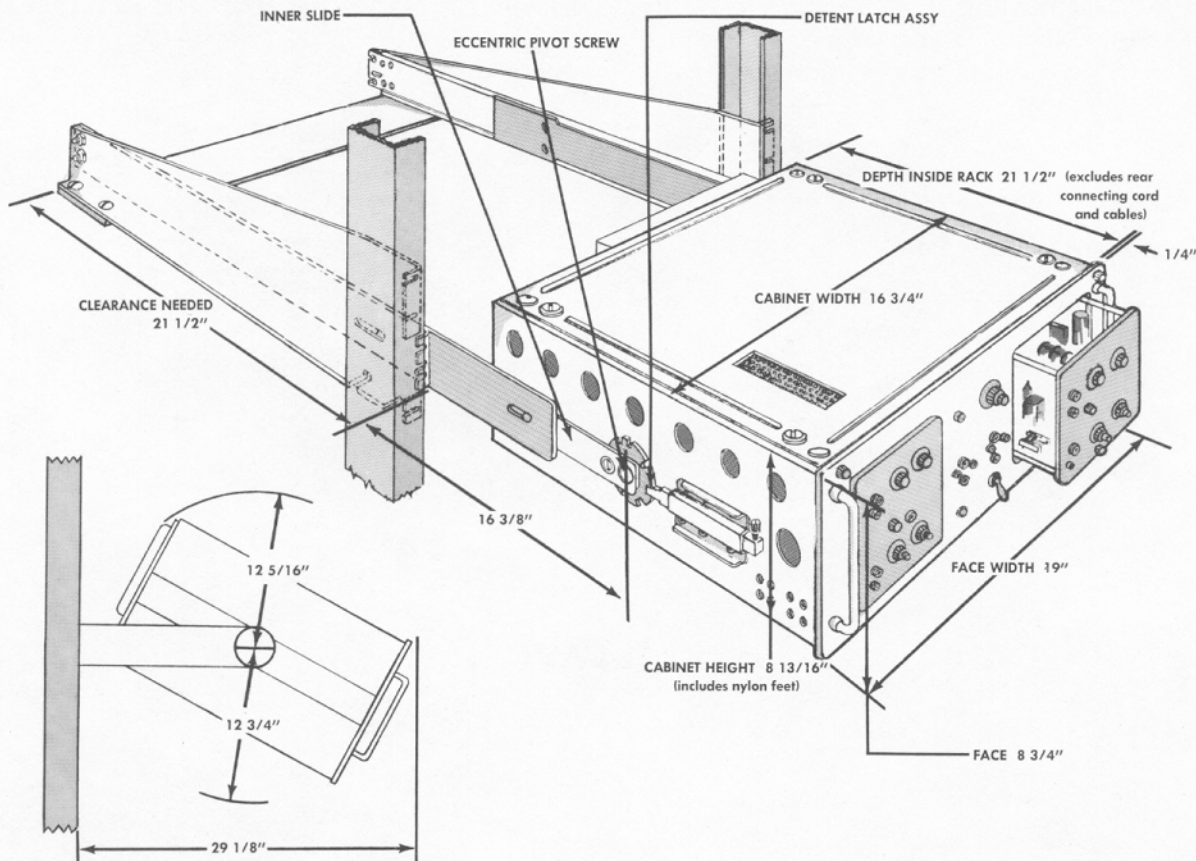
Type 127 mounting dimensions. These dimensions determine the space you must allow for the installation of your 127.
